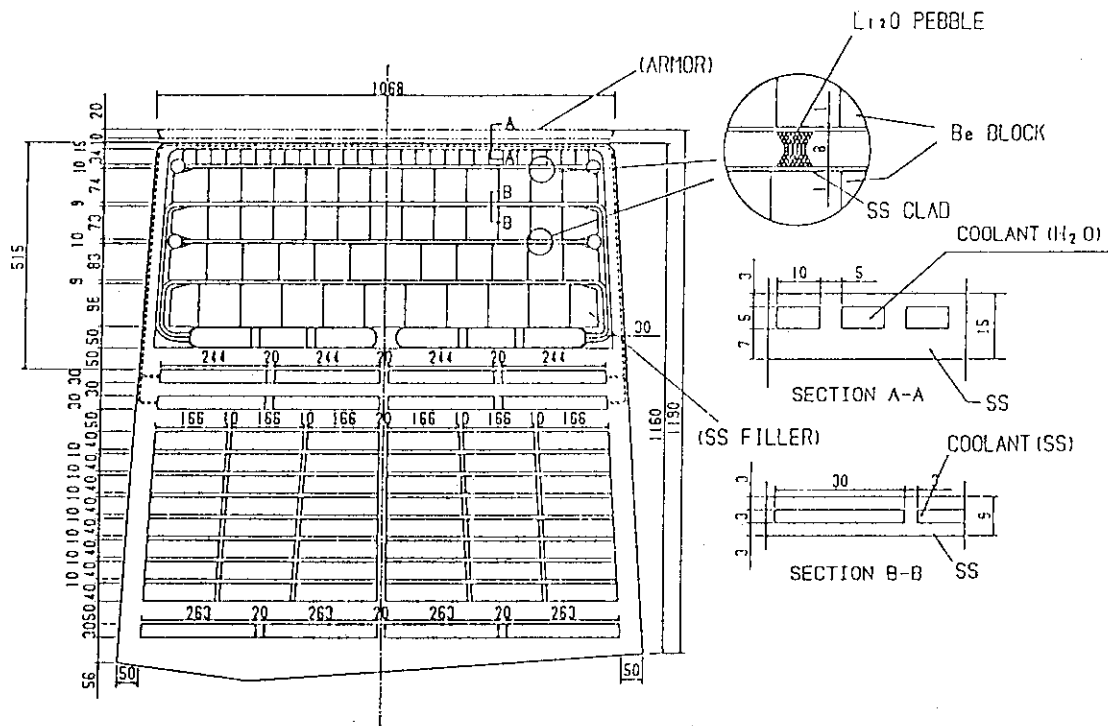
Concept of the pebble and block blanket (cross-sectional view of outboard side module at midplane)
